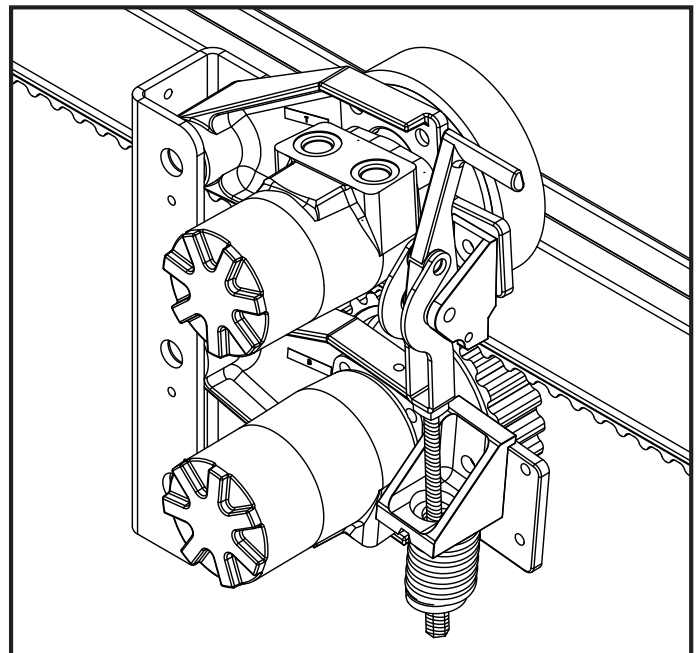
AdvanceDrive and XtremeDrive Wheel combo
